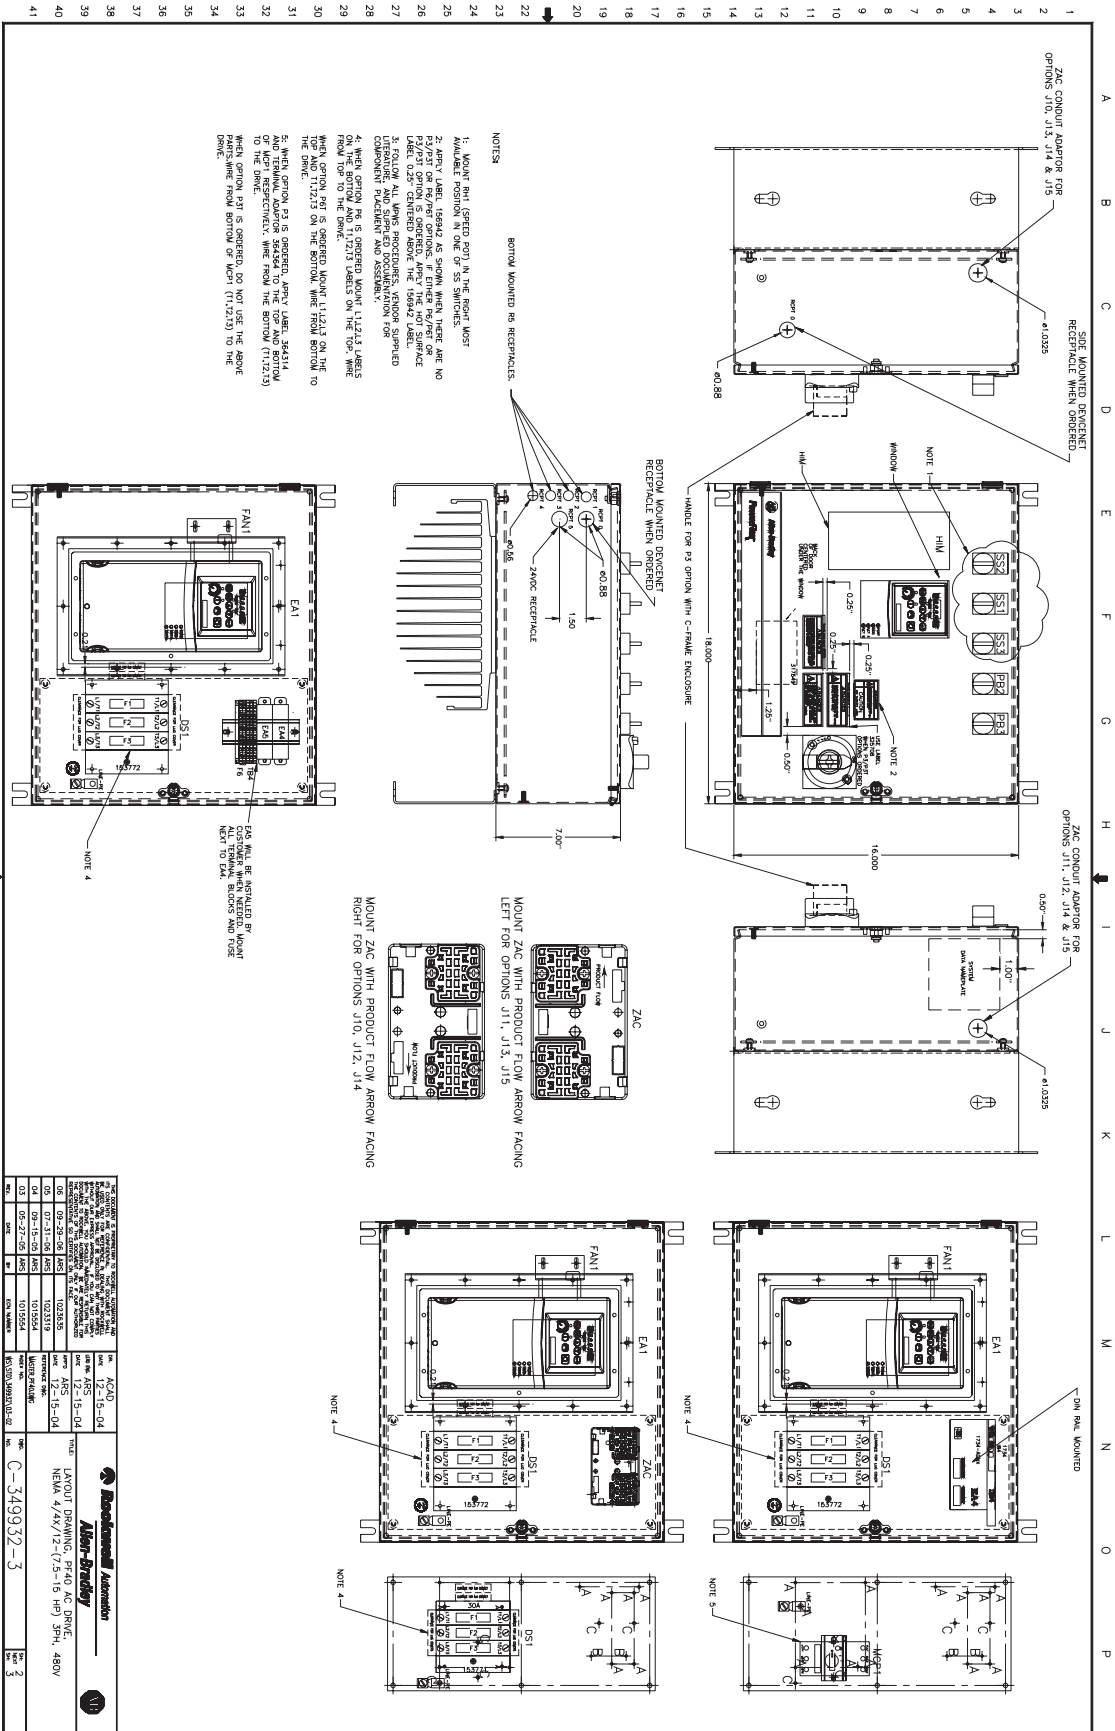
PowerFlex 40 Frame C Layout Drawing
